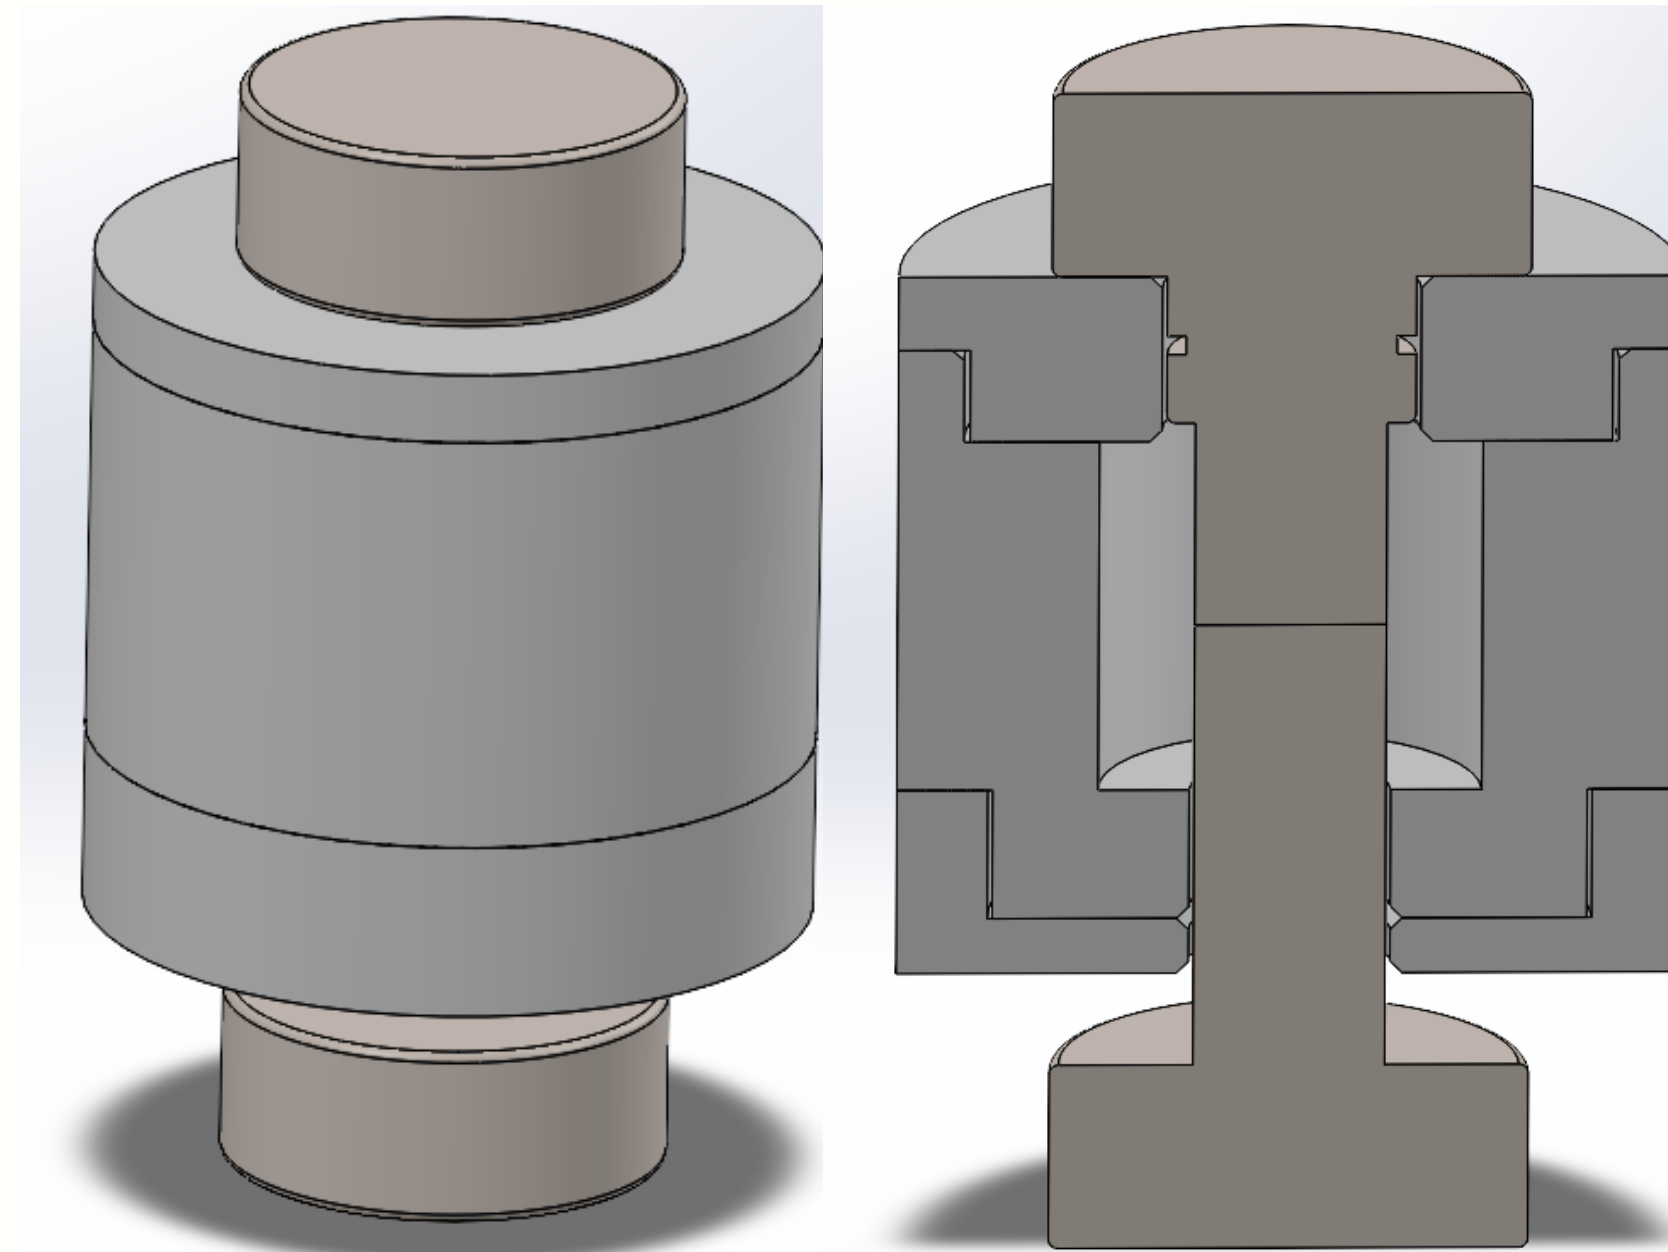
SolidWorks CAD drawing of SSB Testing Cell
